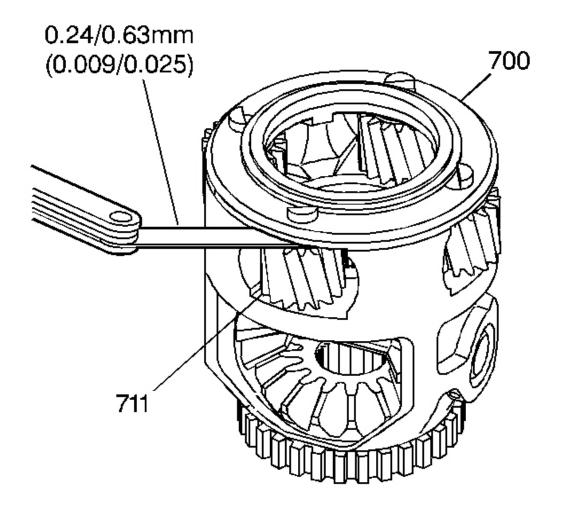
Measuring Differential Carrier Planetary Pinion Gear End Play Courtesy of GENERAL MOTORS CORP.
